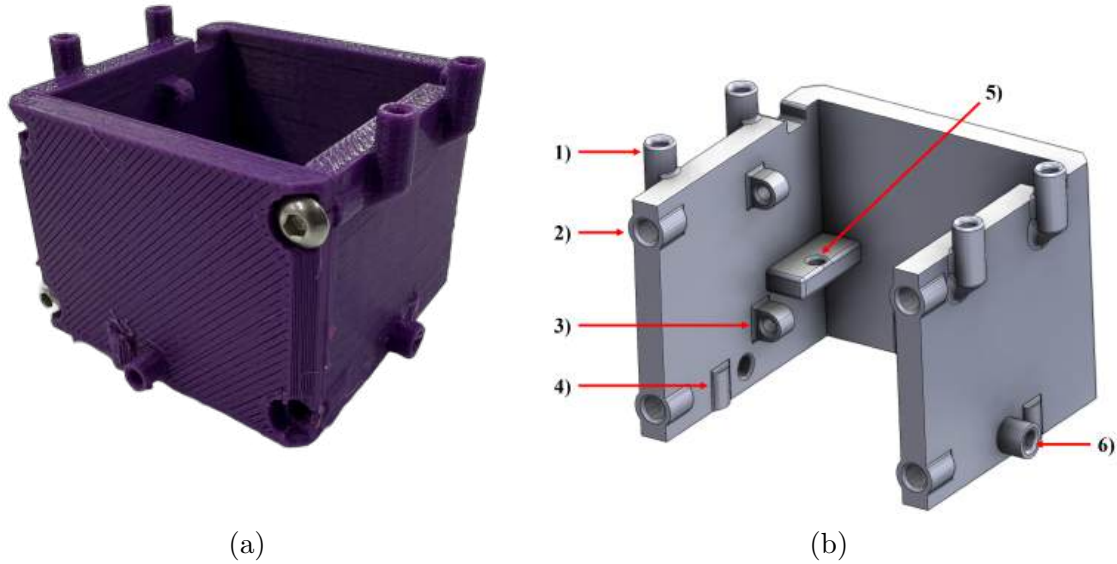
(a) 3D Printed passive node. (b) CAD Housing with labeled mounting points. 1) Mounts for Adafruit Feather microcontroller. 2) Mounting hold for removable wall. 3) Mounting hole for compliant bistable mechanism. 4) Anchor point for incoming cables. 5) Mounting point for Servo. 6) Cable port for incoming and outgoing wire. The cable port also fixes the location of the compression spring.
